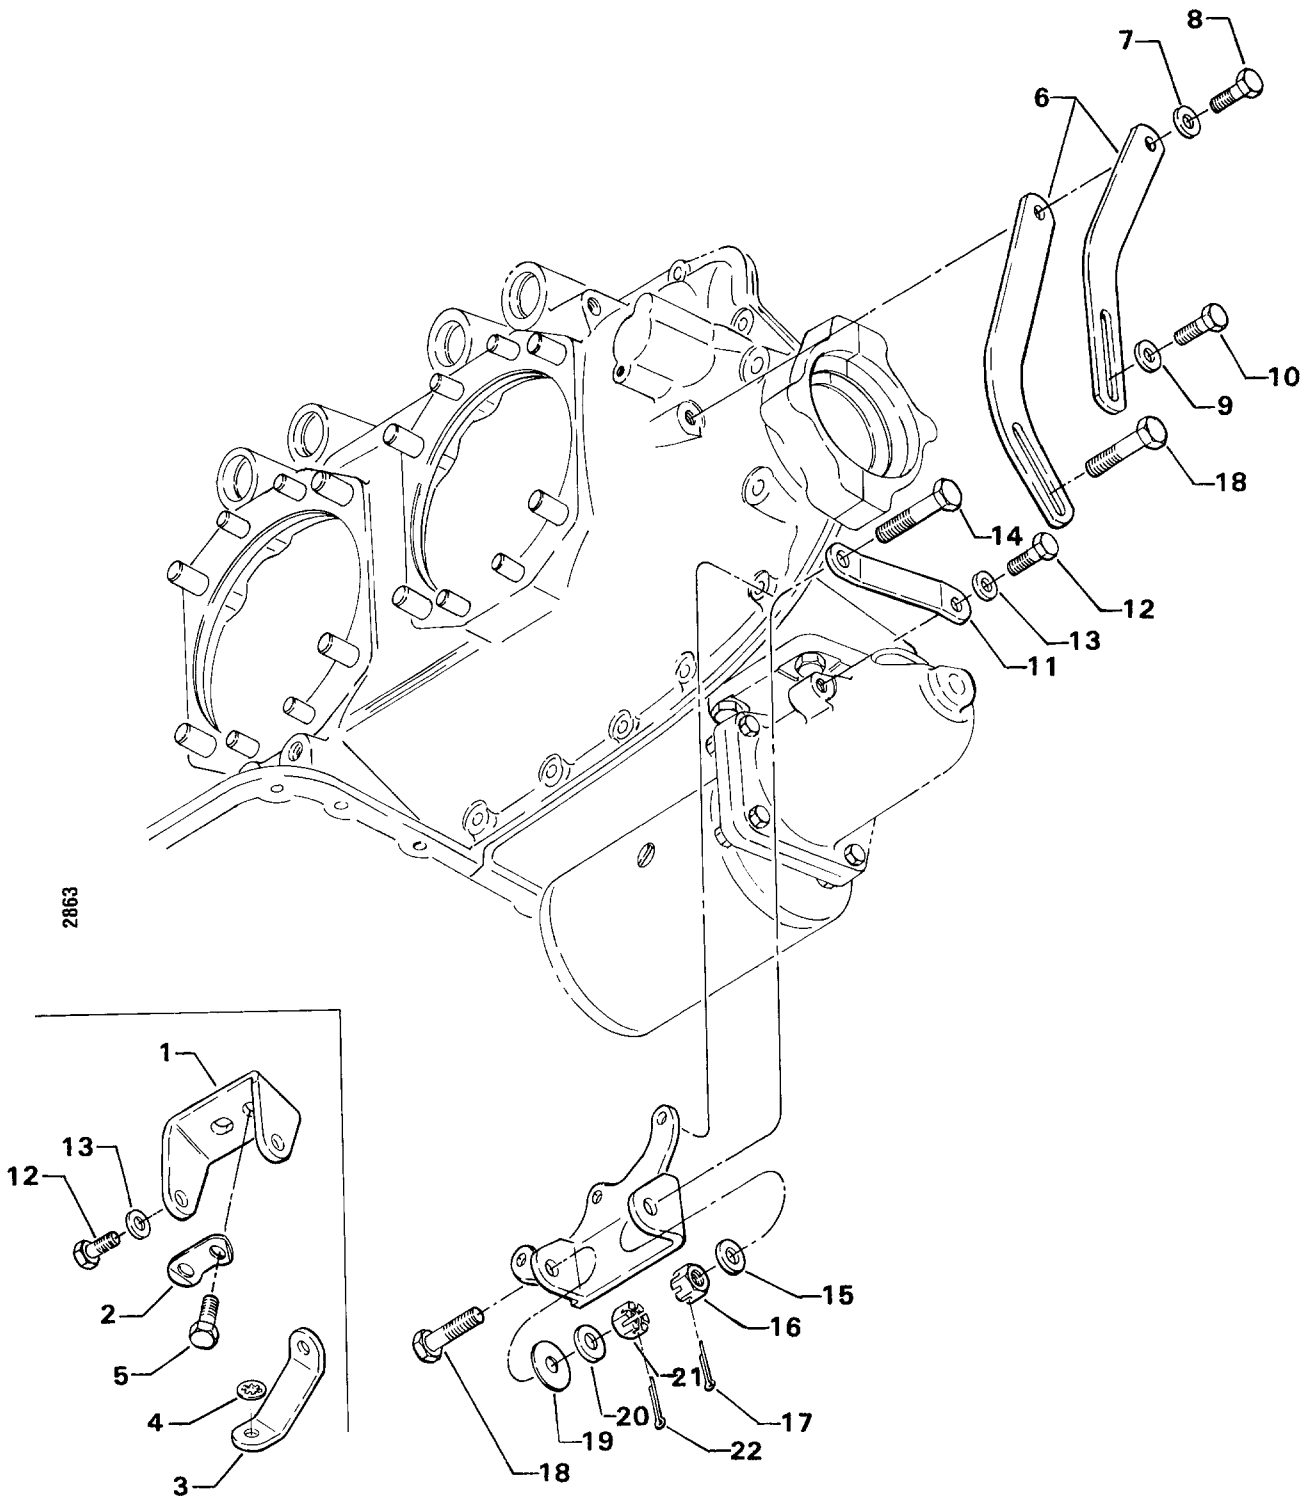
GENERATOR MOUNTING AND ATTACHING PARTS
